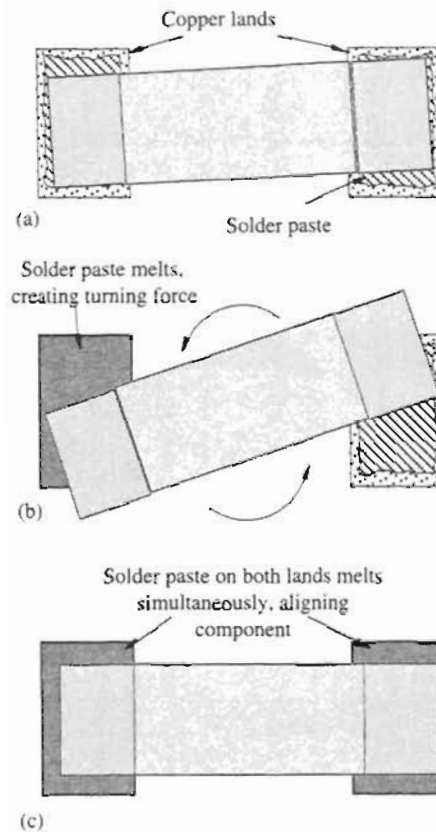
Illustrating effects on a two-terminal component (a) component is placed on solder paste-covered lands (b) if solder paste on one land melts before that on the other, the component becomes mis-aligned (c) if solder paste on both lands melts simultaneously, the component aligns itself
